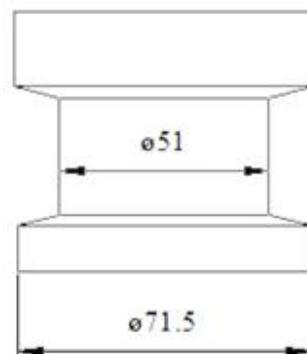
Dimensions of king pin (Dimensions in mm)
